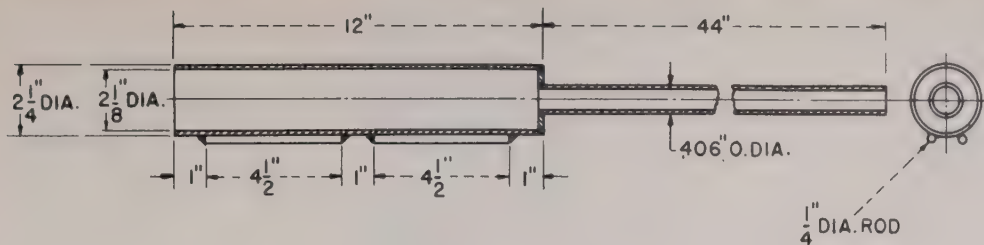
Sketch of an iron tube used for manufacturing pure dry hydrogen.
